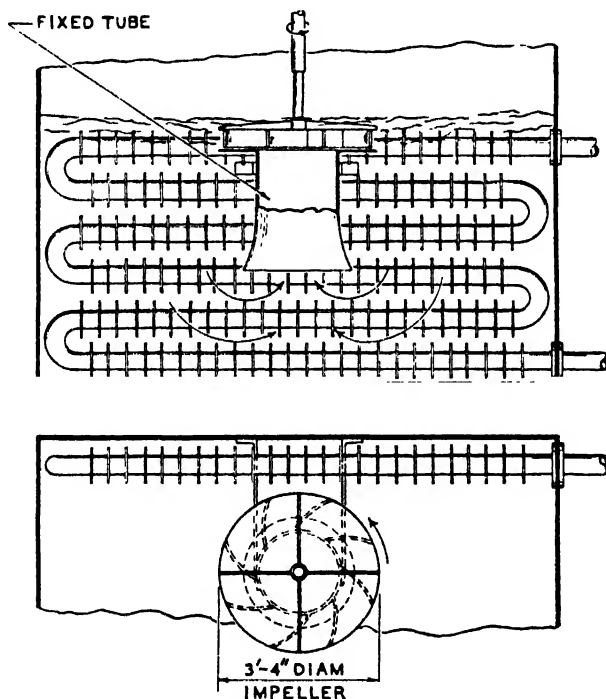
HIGH-CAPACITY LOW HEAD CIRCULATING IMPELLER
